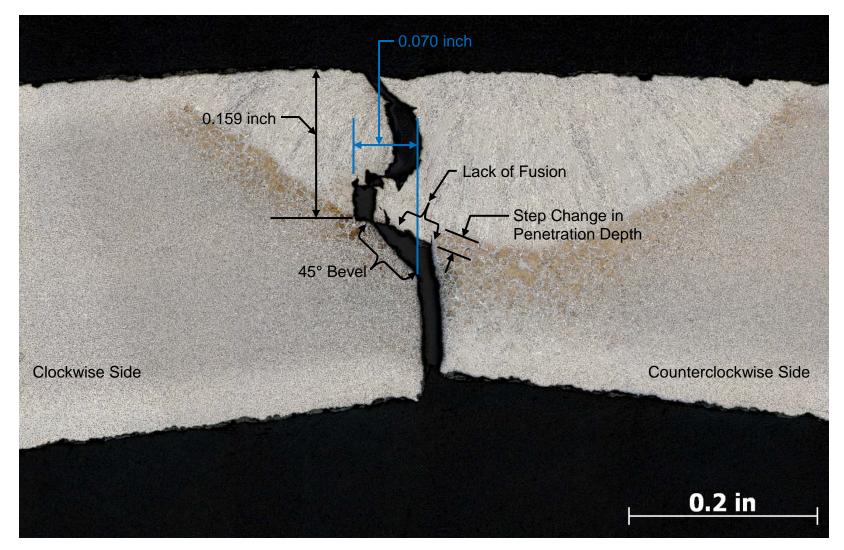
Higher magnification view of the seam in pup 1 (see figure 44) showing the offset from the seam and depth of penetration at the plane of fracture.
